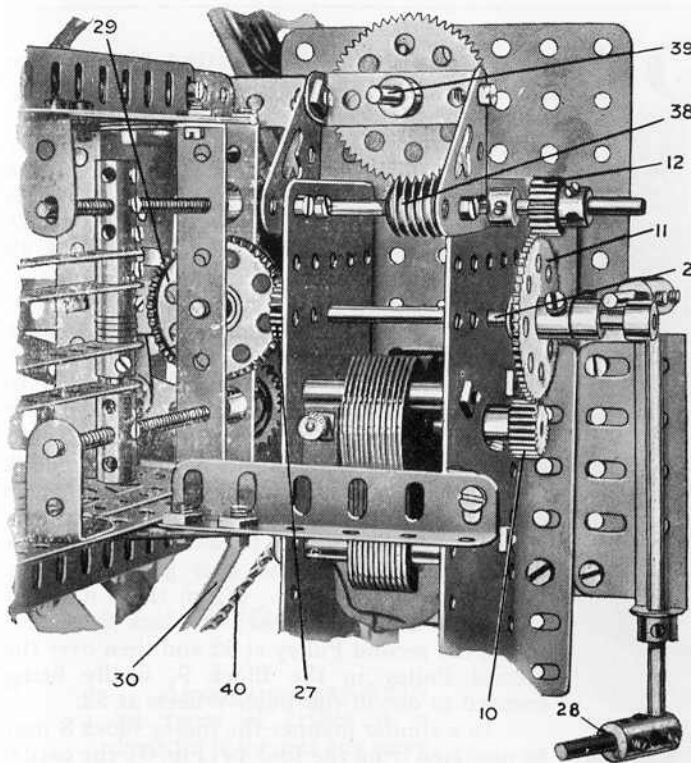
The base of the Jib and portion of the assembled Roller Bearing
